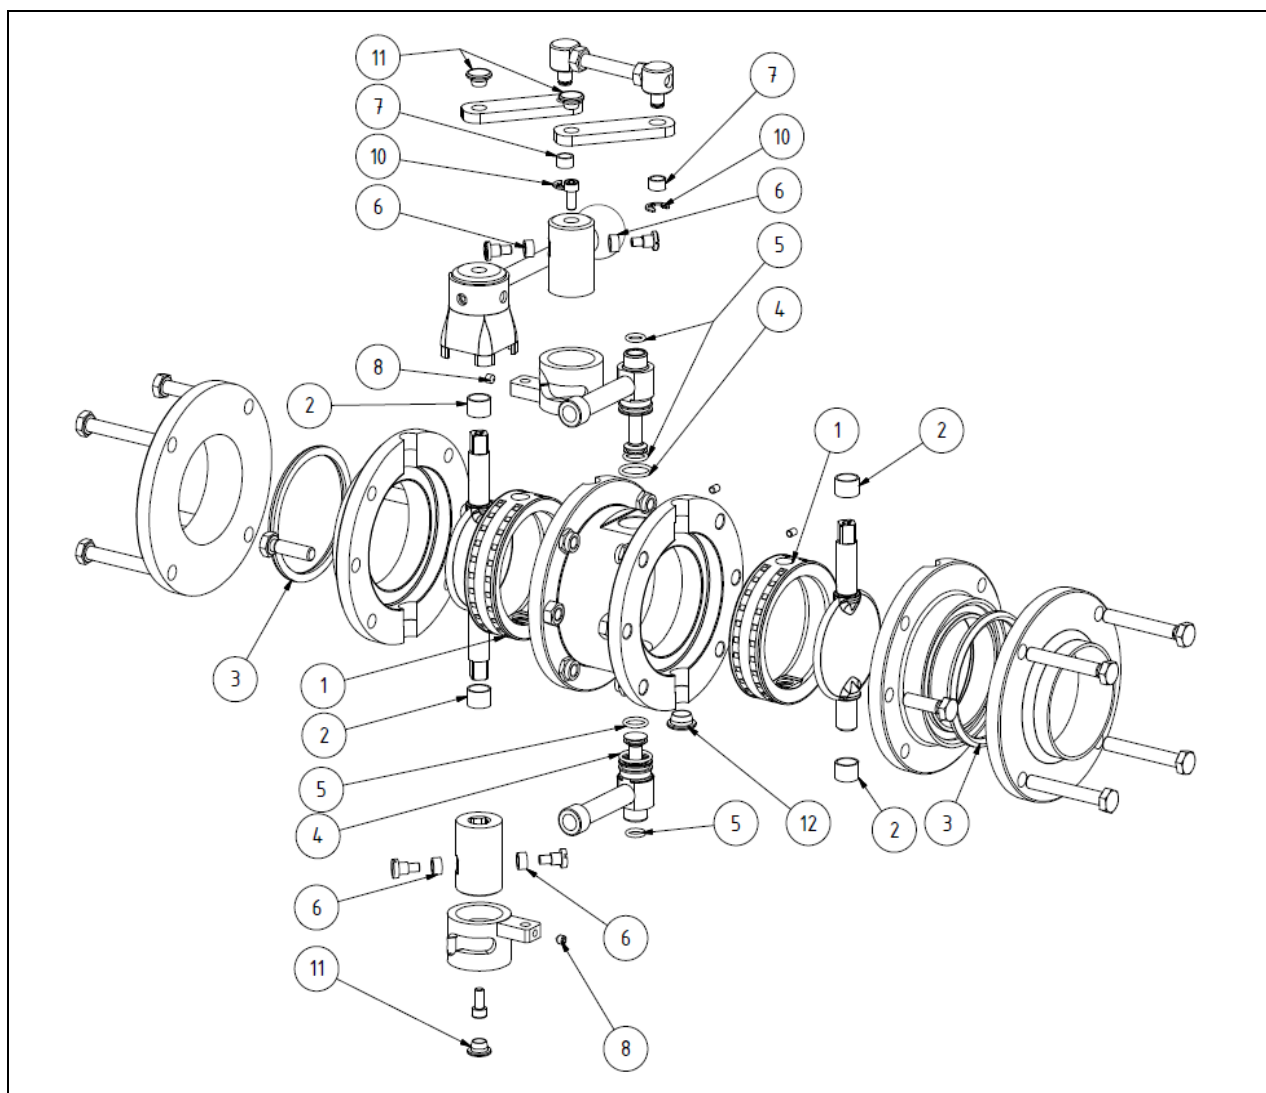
Maintenance Kit for the Leakage Butterfly Valve with Handle
